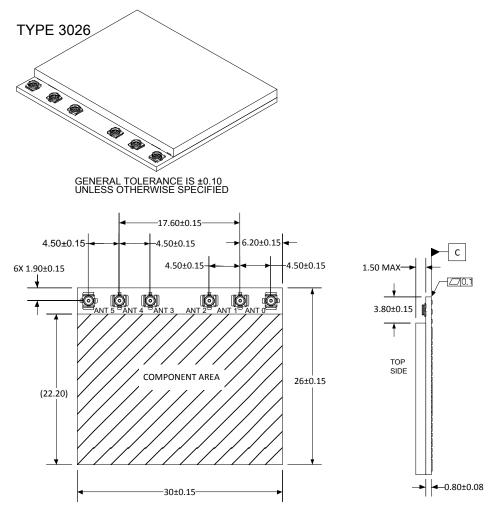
M.2 Type 3026-S3 Mechanical Outline Drawing Example
